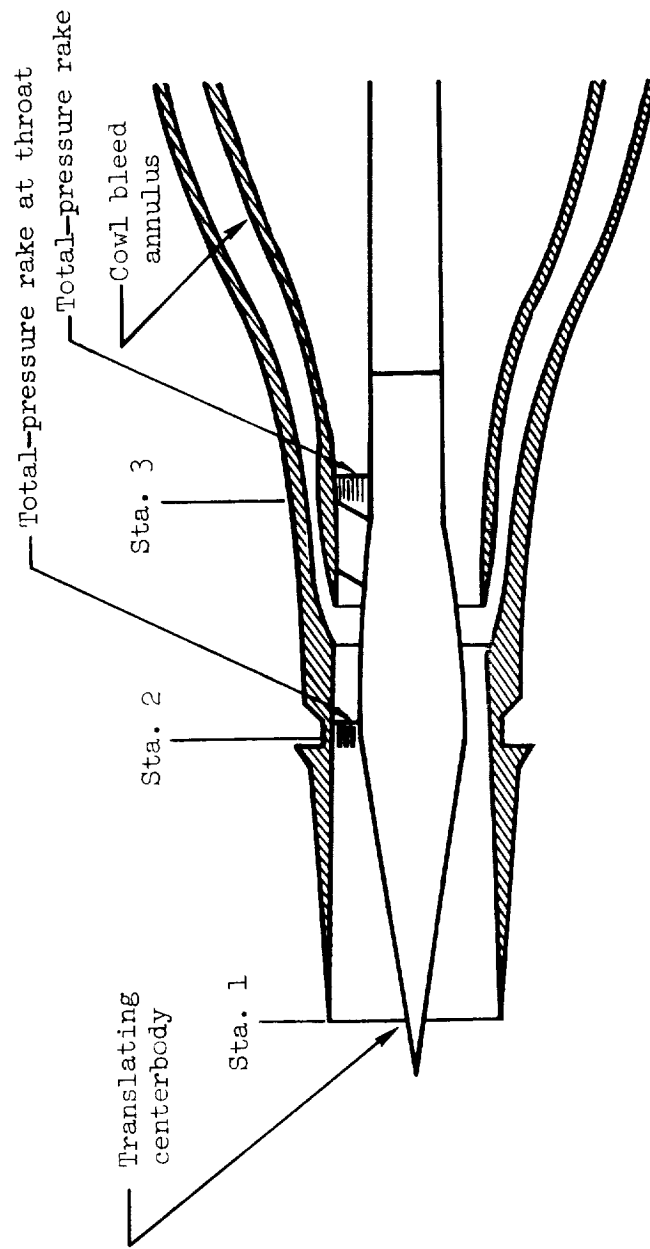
Schematic drawing showing assembly of the circular internal-contraction inlets.
